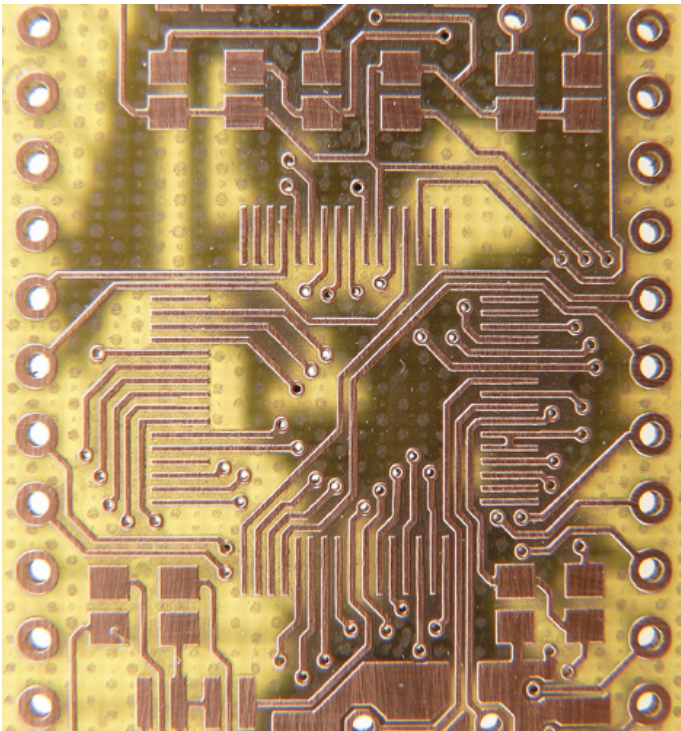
Detail of a PCB milled by the PCB Prototyper. Some of the isolation tracks are only 0.15 mm wide.
